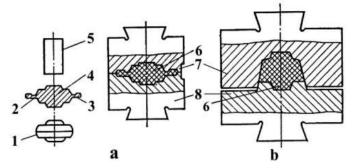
Die forging process in open (a) and closed (b) dies: 1 -forging; 4, 6 - forging with flashes 2 and 3; 5 - billet for forging; 7, 8 - parts of the die; b: 1, 2 - parts of the die
